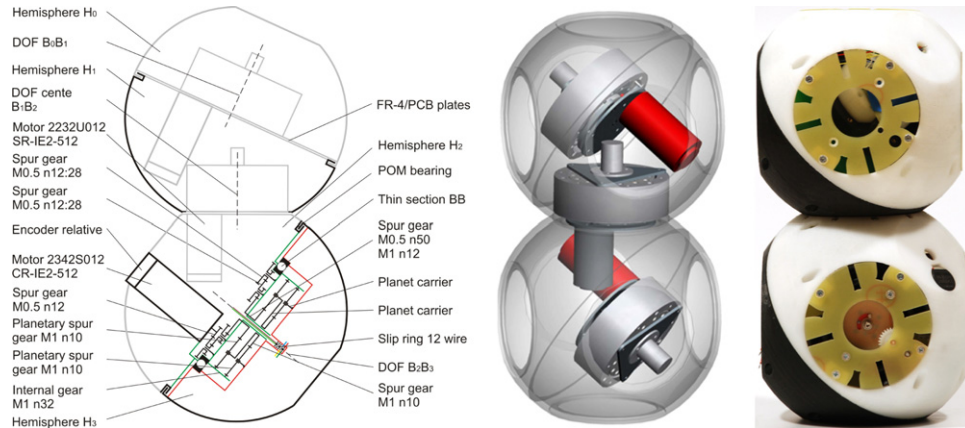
Left and center: Schematics of the gearbox and shell mechanics of a single Roombots module, one of three joint actuators is depicted in detail. Active connection mechanisms (ACM) and passive connector plates are omitted. Right: picture of a full Roombots module. The lower frontal connector is a fully equipped, active connection mechanism. The upper frontal slot is equipped with a passive connector plate.
